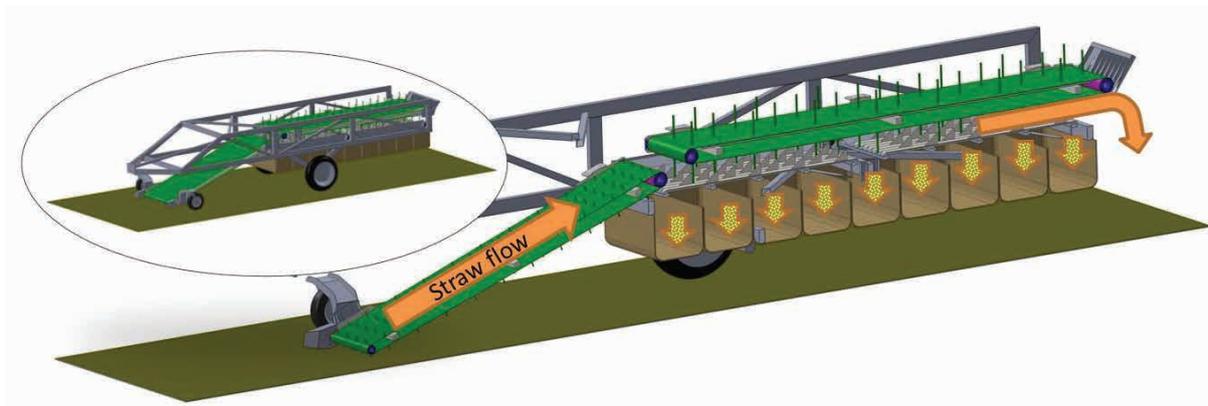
Schematic drawing of a machine for seed gathering from swath deposited hemp crops
